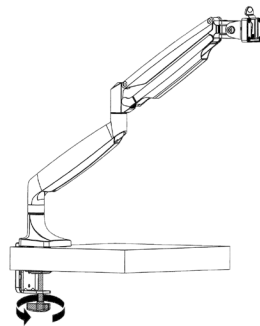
Lift Arm Assembly up and slide onto the table.
